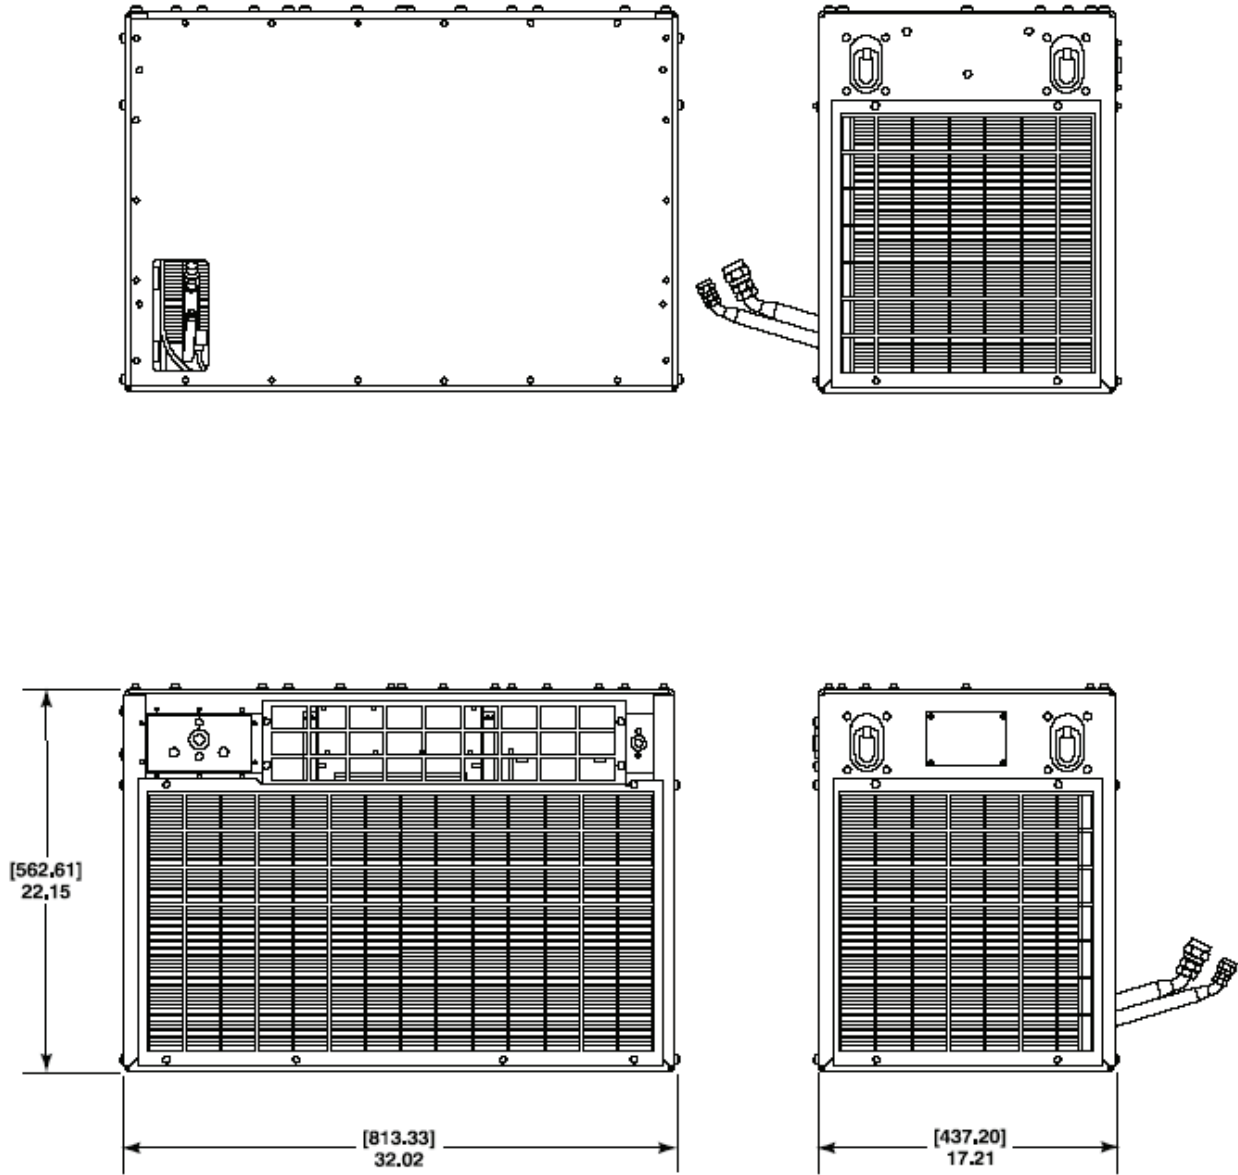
CONDENSER ASSEMBLY INSTALLATION DIMENSIONS.
